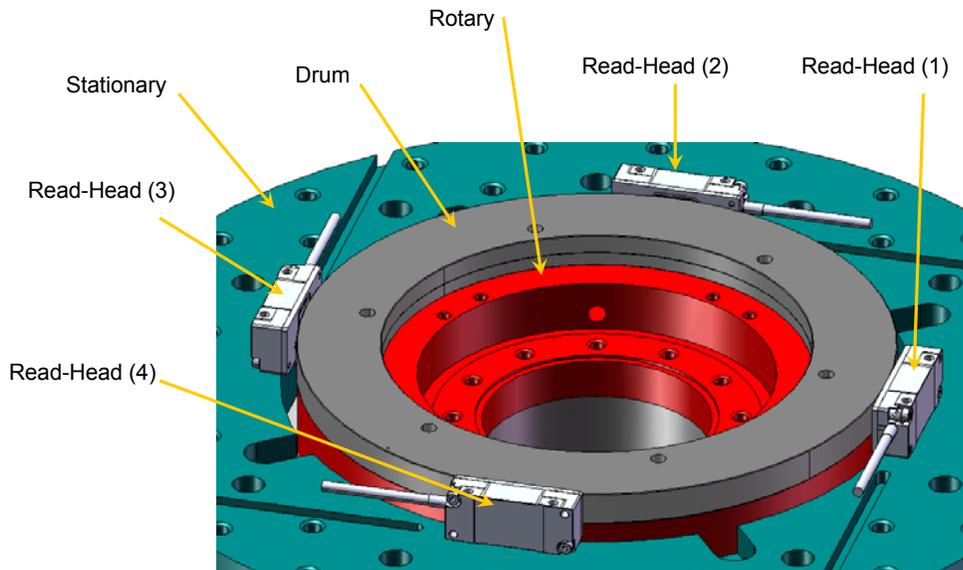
ERA4282C read heads arrangement in the PRT design
